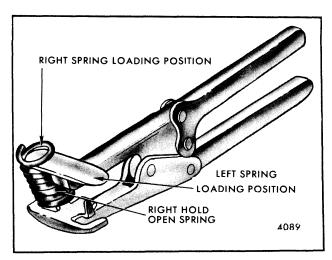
Hold-Open Spring, Loading Positions Using Tool J-23497, or Equivalent
